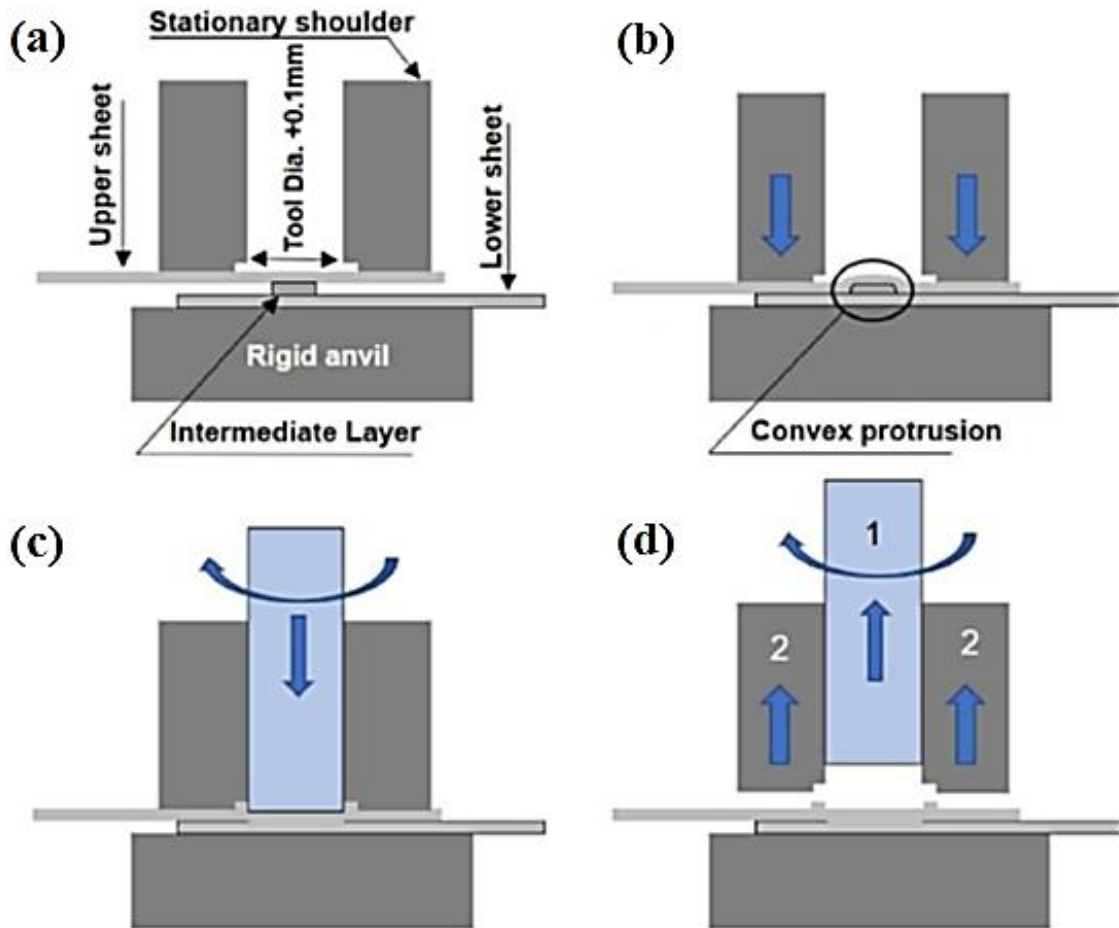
Scheme of the IL-FSSW process: (a) welding fixture; (b) part clamping; (c) tool plunge; (d) tool retraction [63]
